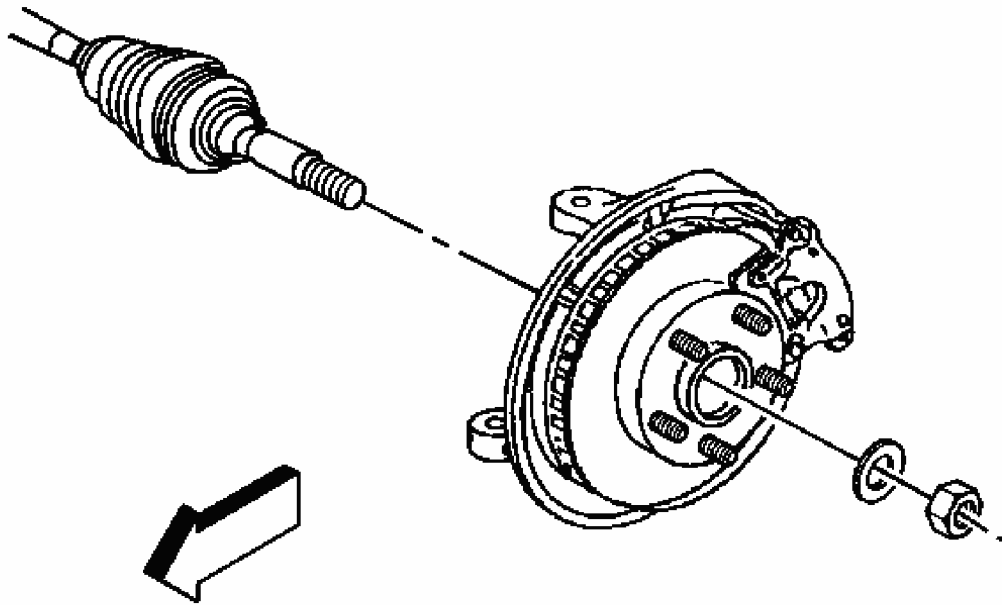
Removing Drive Axle Nut, 4WD Vehicles Only
